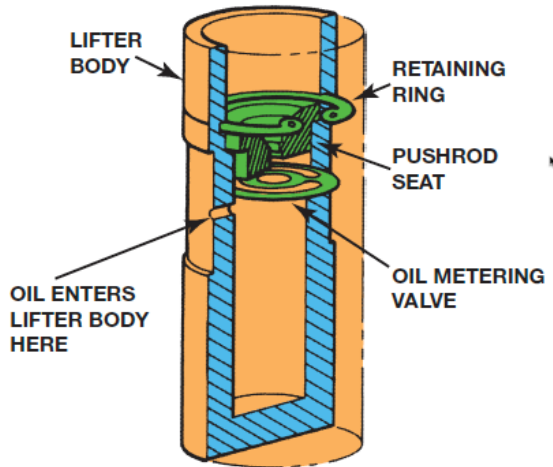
A solid lifter. The oil metering valve supplies oil to the hollow pushrod to lubricate the rocker arms. This type requires mechanical adjustment.
